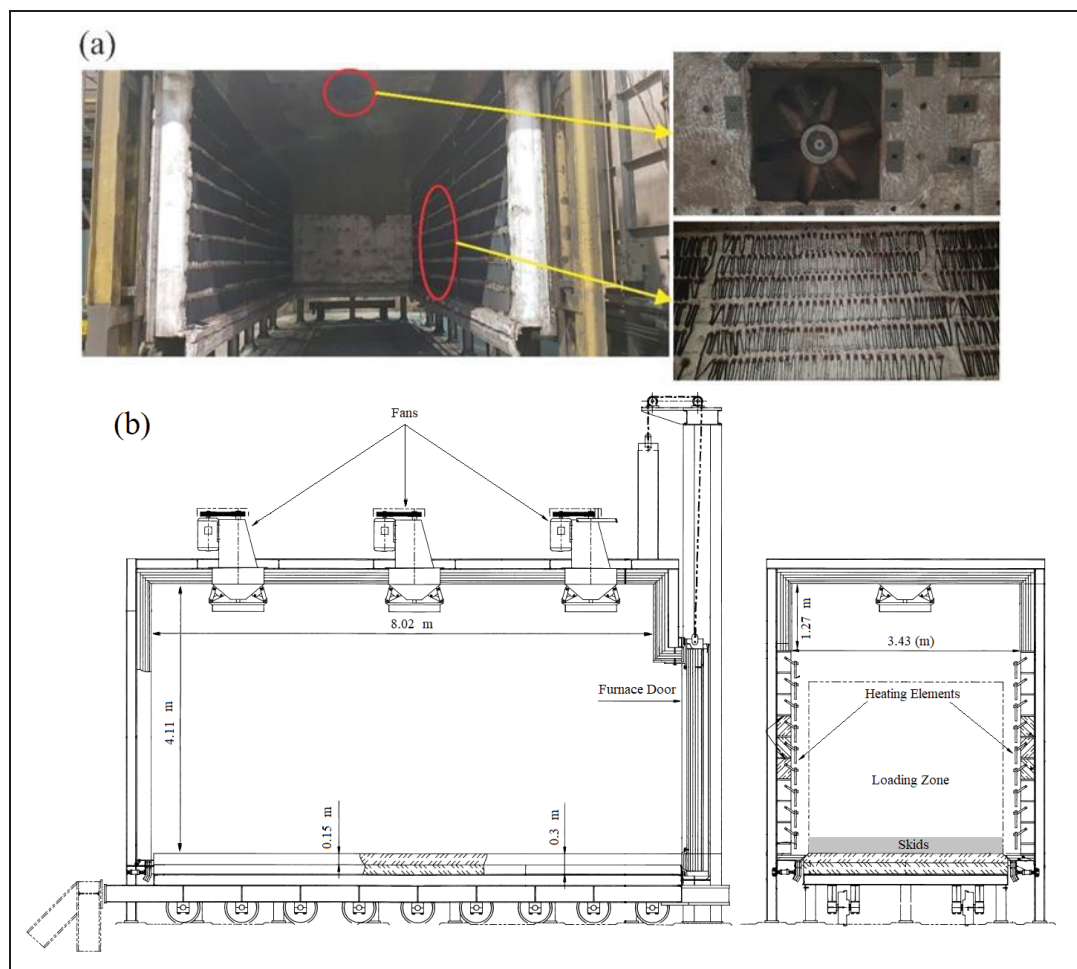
(a) Car bottom electrical furnace and (b) its corresponding drawings and dimensions
